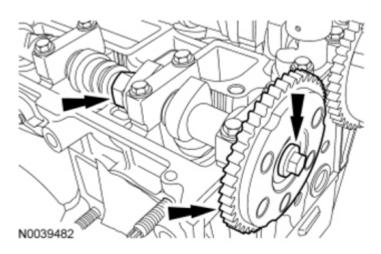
Locating Bolt And Exhaust Camshaft Sprocket Courtesy of FORD MOTOR CO.
